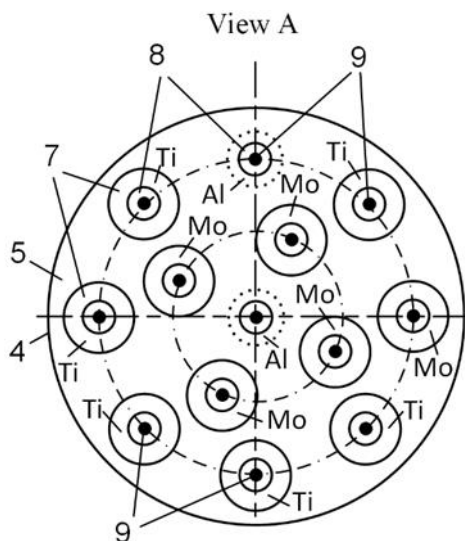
External view of the composite cathode assembly with Ti and Mo inserts
